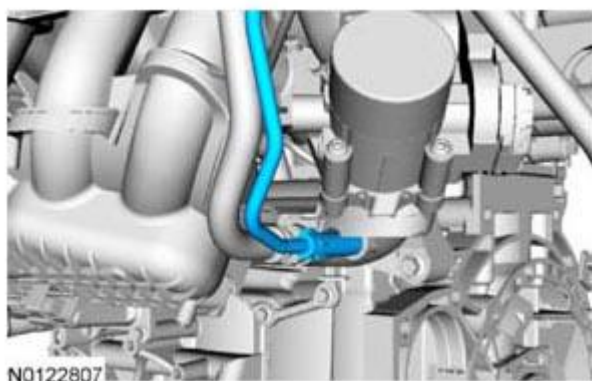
Identifying Evaporative Emission (EVAP) Canister Purge Valve Tube And Intake Manifold
